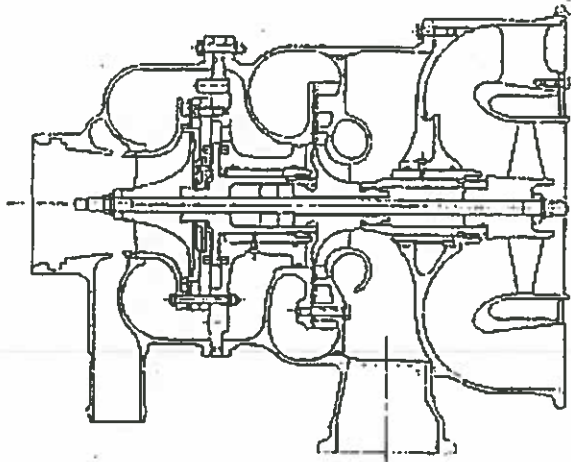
SAAB-2000 Foil Bearing Air Cycle Machine
